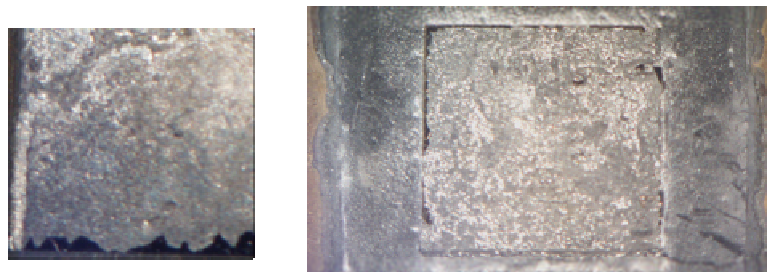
(a) Back of die (b) Top view of substrate shows solder attachment
